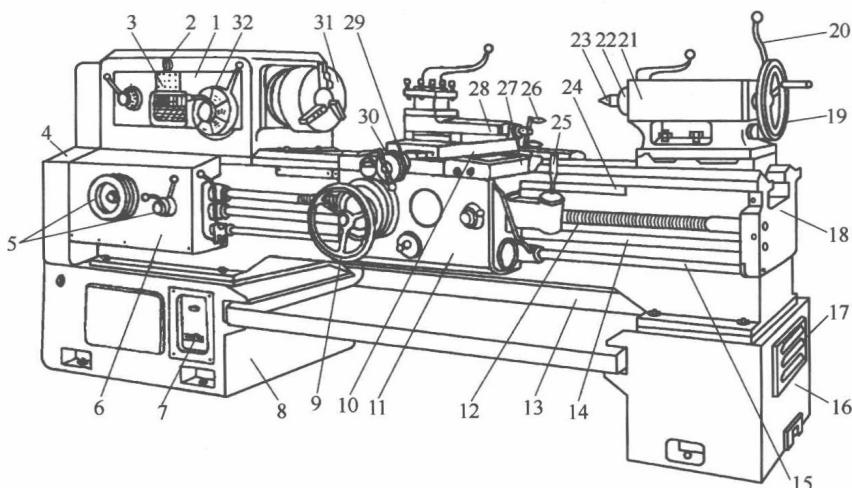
1. 1 Horizontal lathe 卧式车床
